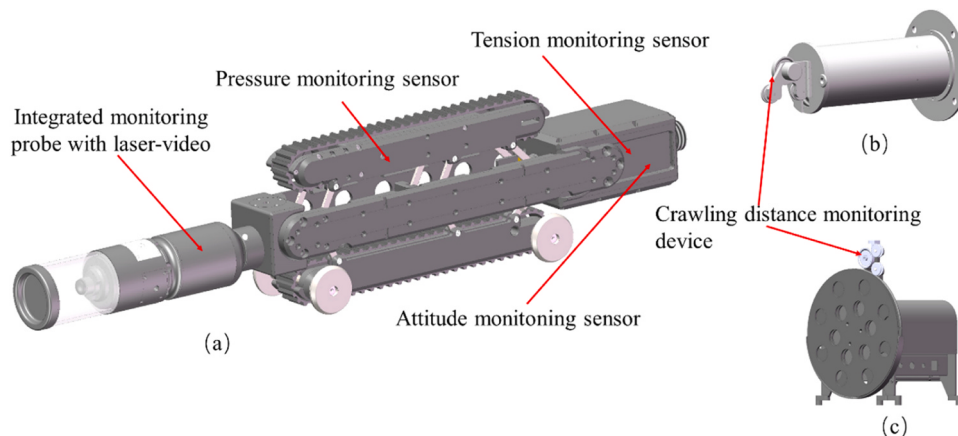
Monitoring system layout diagram: (a) crawling robot; (b) extended sleeve; (c) cable drum.
